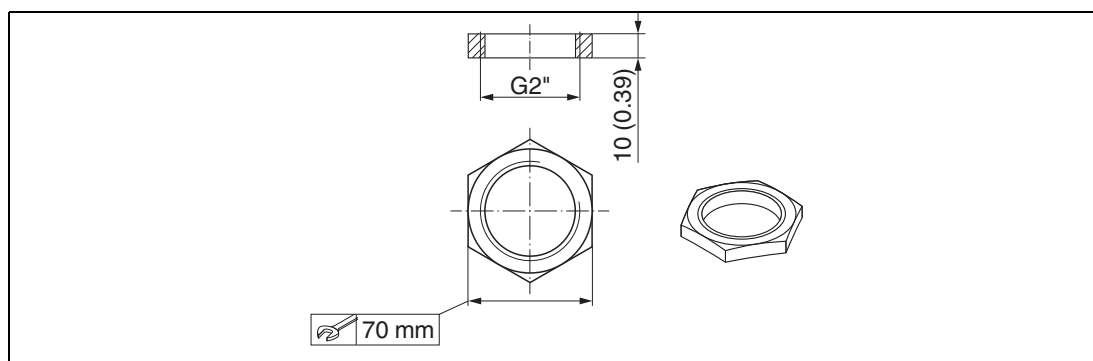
Dimensions of securing nut, engineering unit: mm (inch)
